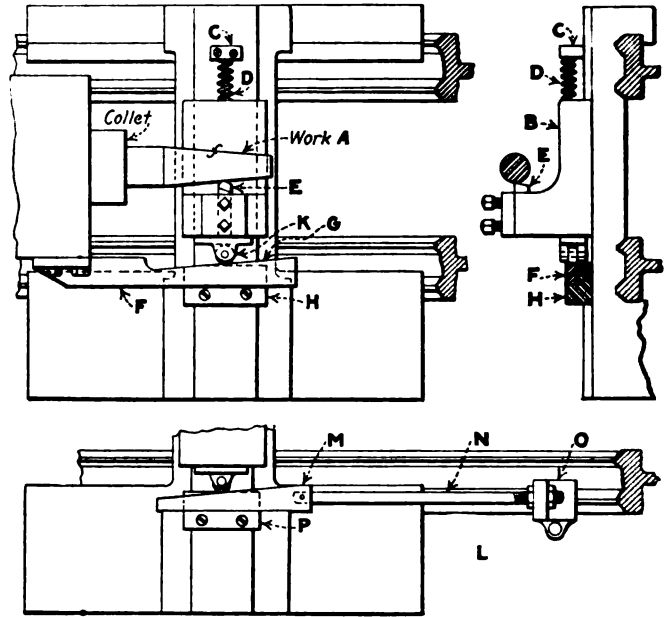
SIMPLE TAPER ATTACHMENT FOR ENGINE LATHE
